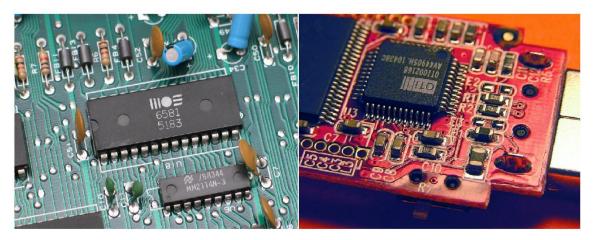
Hole and Surface Mounted Parts; An image showing a comparison of hole mounted parts and surface mounted parts; reprinted with permission from User: John Fader and Christian Taube
